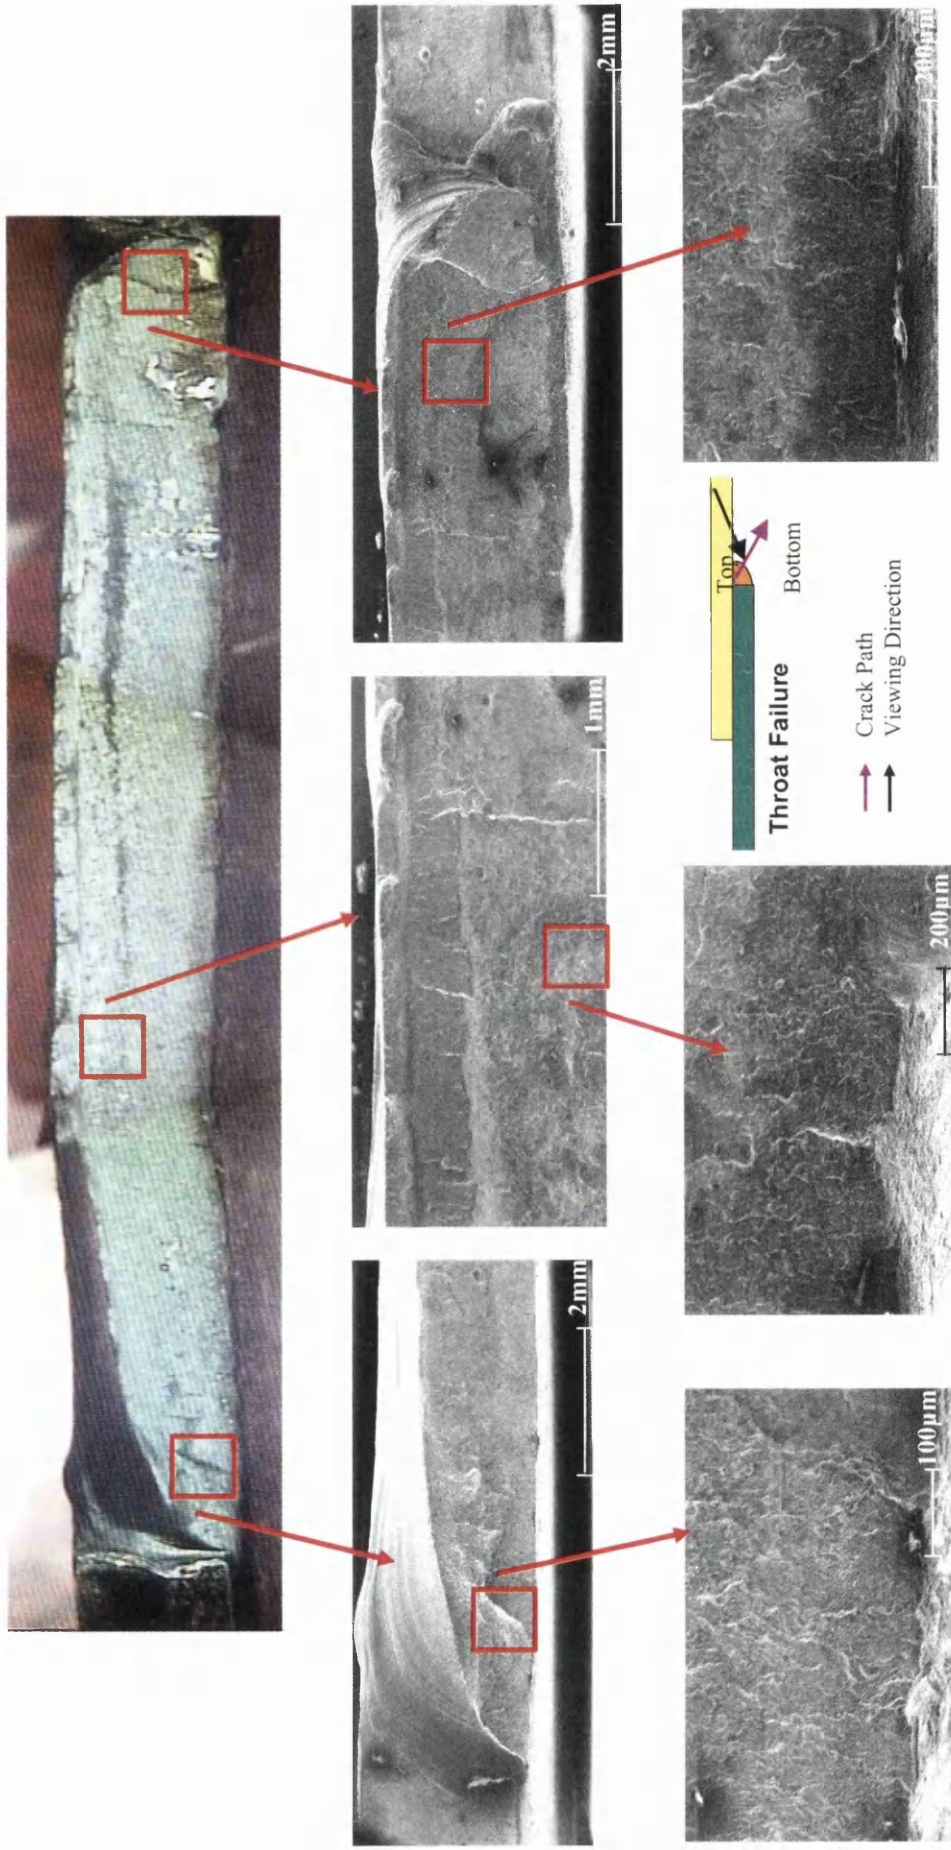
Typical Fracture Surface for GM3 Weld Throat Failure – Sheet View
